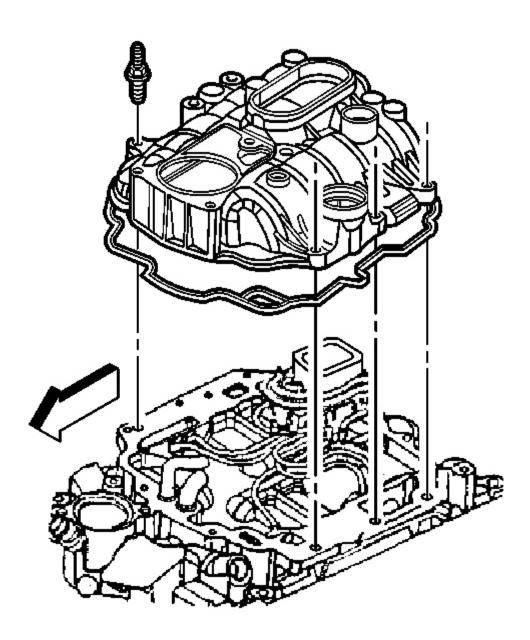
Identifying Upper Intake Manifold Attaching Studs Courtesy of GENERAL MOTORS CORP.
